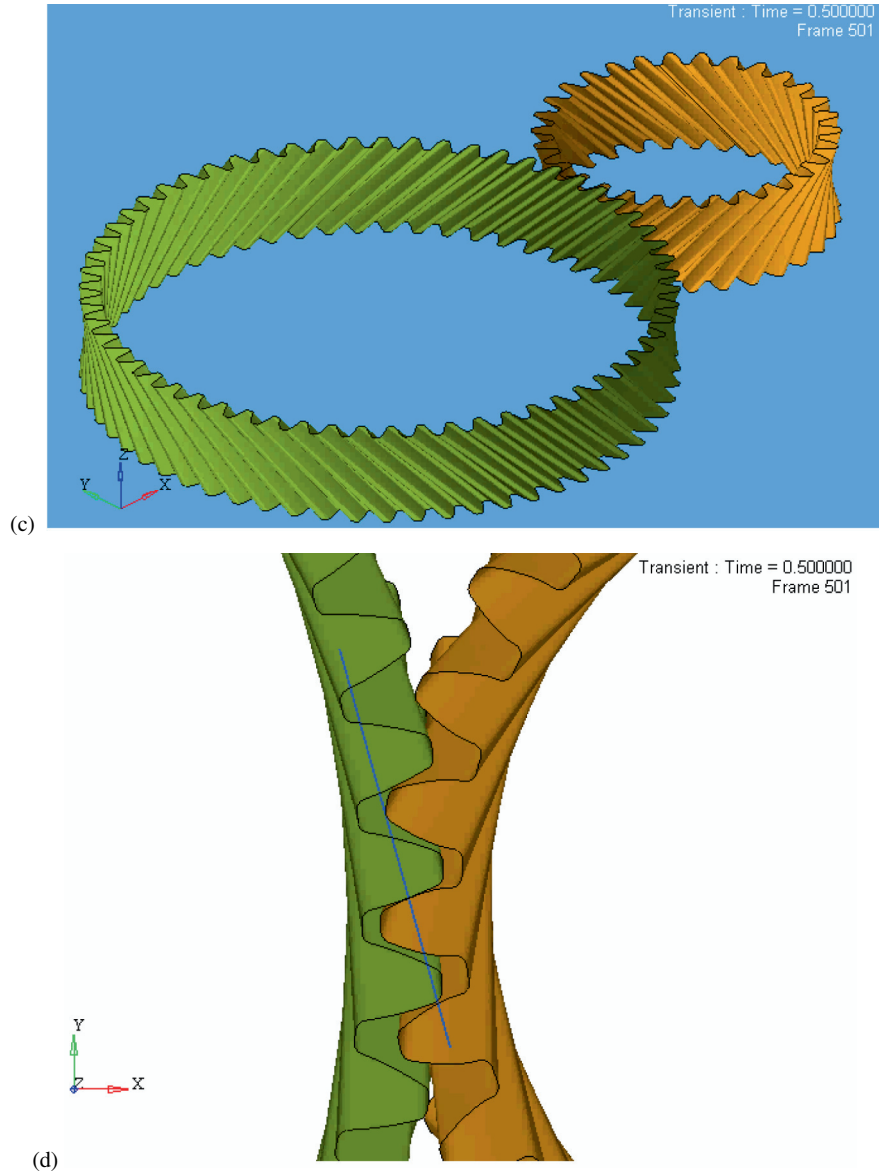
(Continued) (c) Two helical gears in action. (d) Engagement of helical gears
